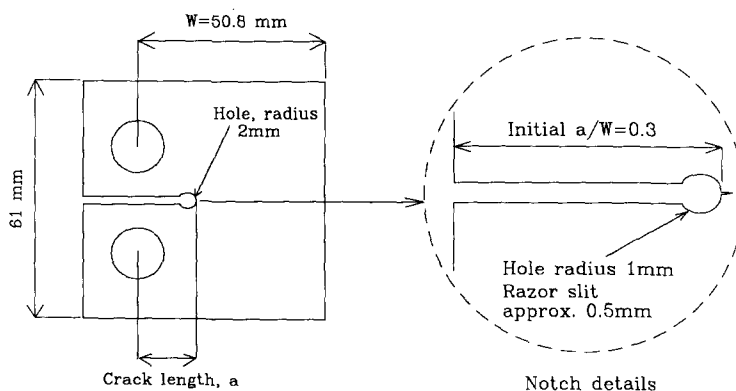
Compact tension specimen geometry with notch details employed for fatigue crack growth testing
